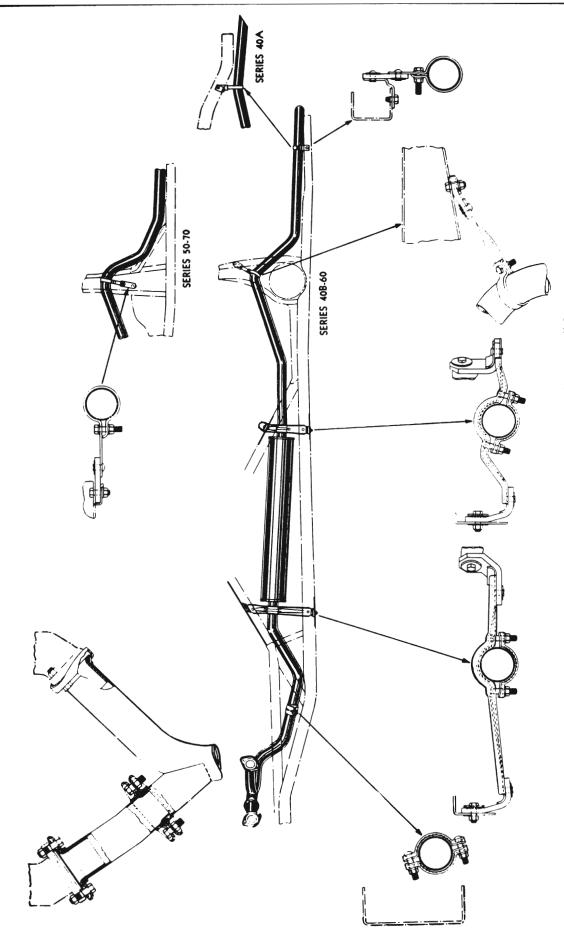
Exhaust System Mountings—Compound Carburetion, All Series
